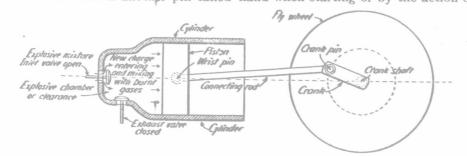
THE FIRST STROKE, SHOWING POSITION OF VALVES WHEN PISTON IS DRAWN BACK ON THE FIRST STROKE AND ENTRANCE OF EXPLOSIVE
